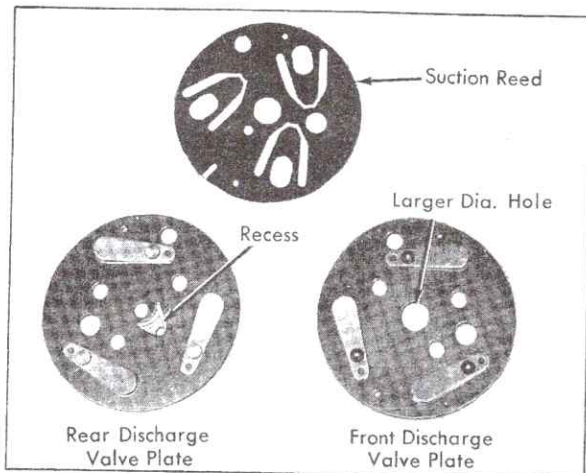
Front &amp; Rear Discharge Valve Plates
